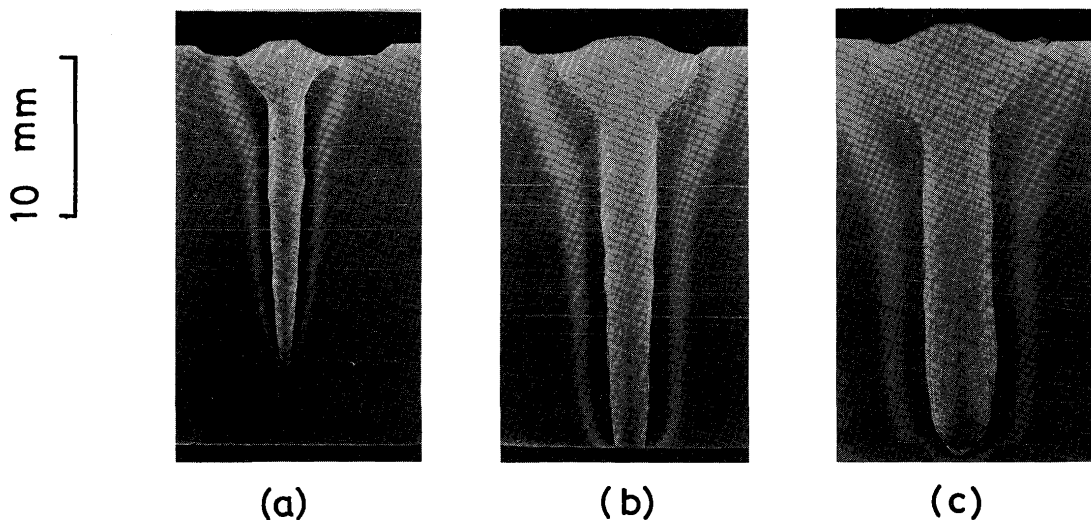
Typical example of HT50 welds for different three weld heat inputs.
